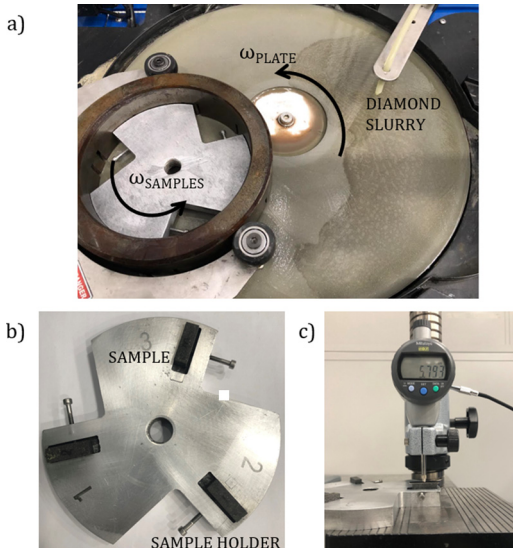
(a) Lapping set-up, (b) jig holding the cBN segments, and (c) measurements of segment height during the test.
